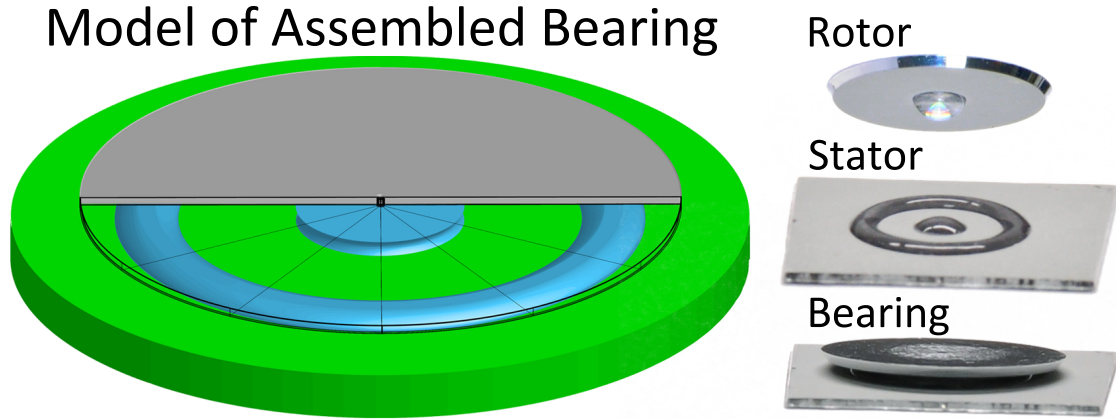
A model of ring and axle liquid bearing, with photographs of a rotor, stator and assembled bearing. The model rotor is rendered as partially transparent so the liquid pattern can be seen.
